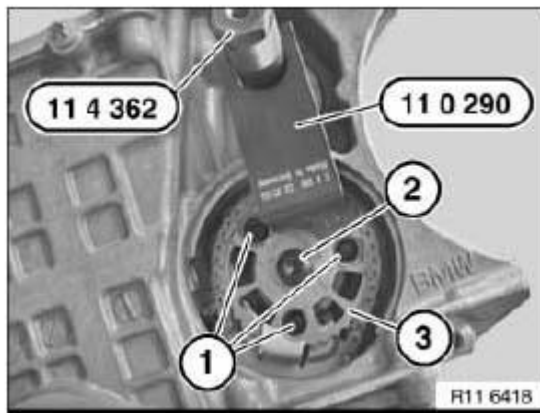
Identifying Special Tool (11 0 290), (11 4 362), Crankshaft Sprocket Wheel And Mounting Screw
